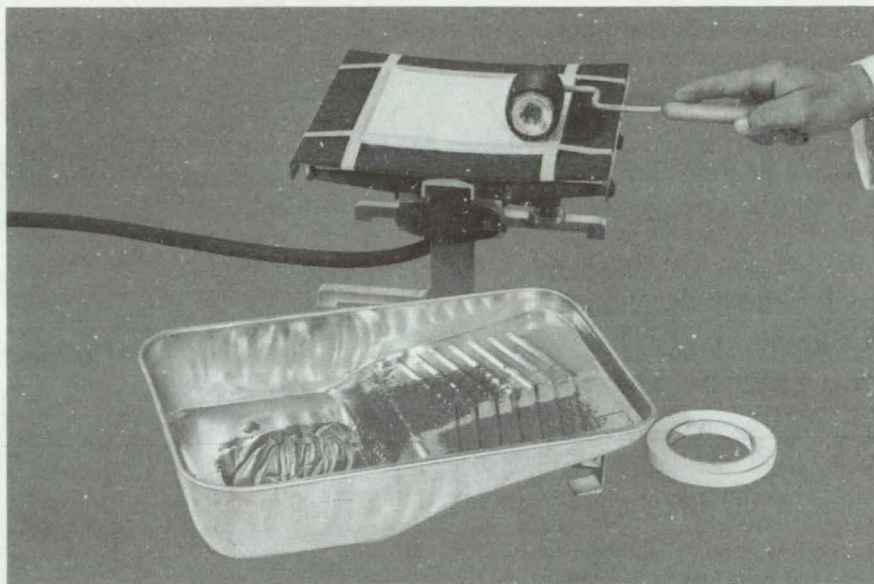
A Cork/Rubber Backing covers the plate surface. A tile, its edges taped down, is being roller coated with RTV adhesive prior to mounting.
